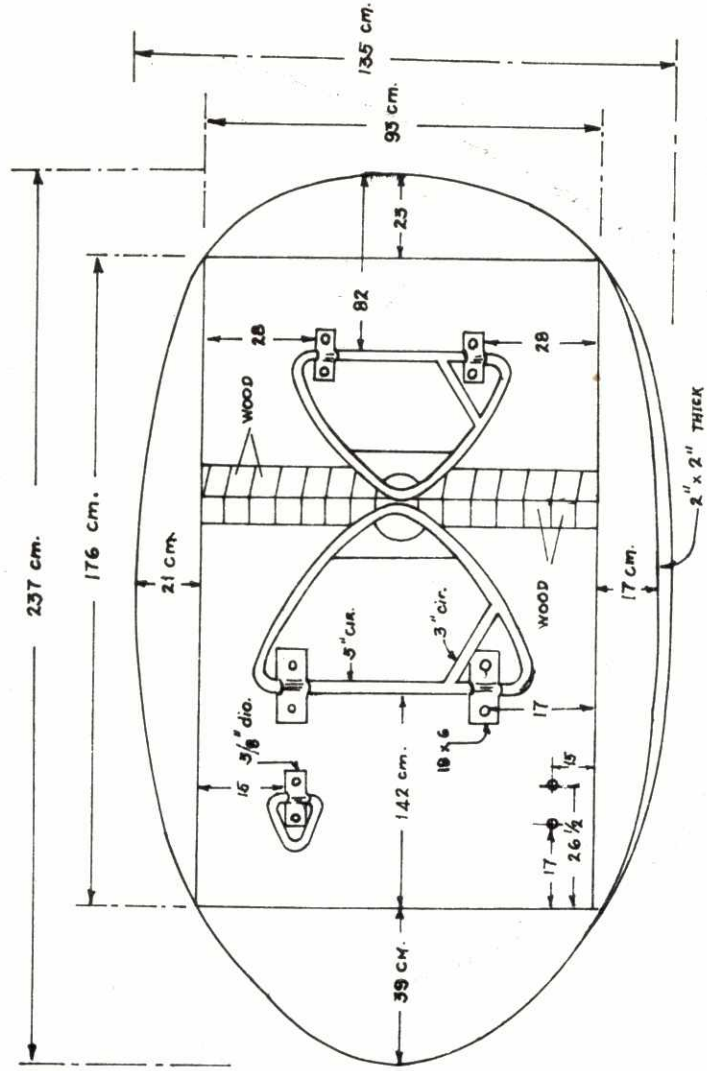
A diagrammatic drawing of the oval-shaped otter board used by M/V Lapu-Lapu in the Western Visayan Sea.
